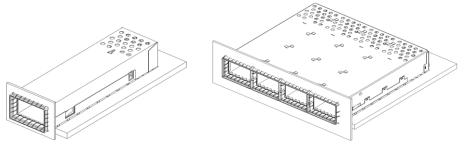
1x1 and 1x4 cage, host PCB and panel
